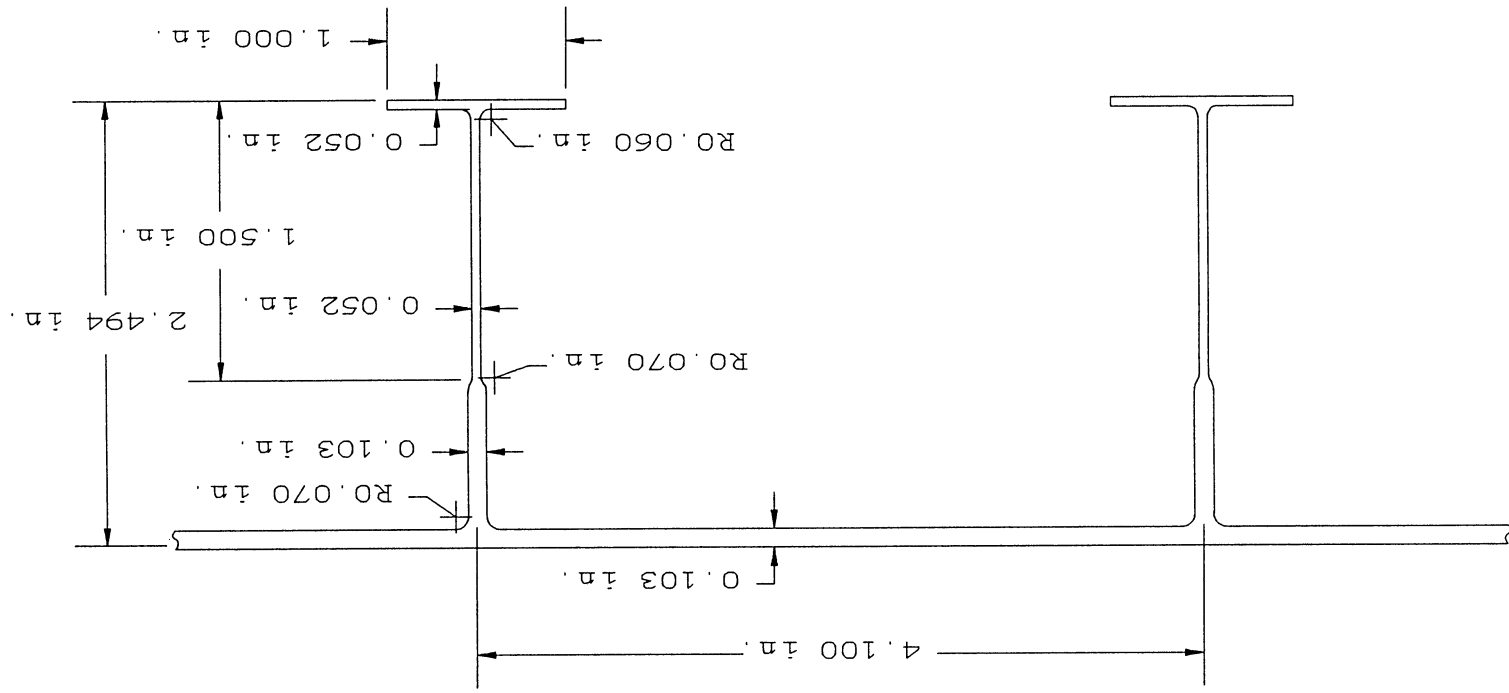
Typical Mid-Fuselage Skin Structure Cross-Section
